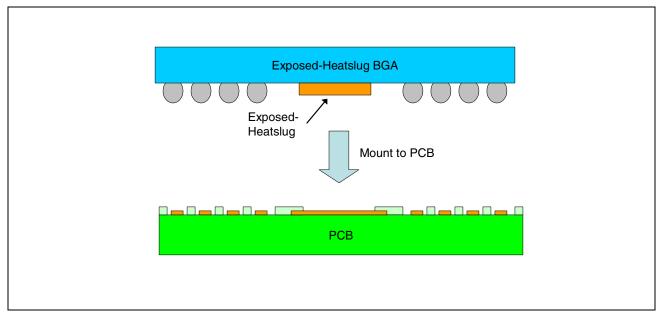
Surface Mounting of Exposed-Heatslug BGA
